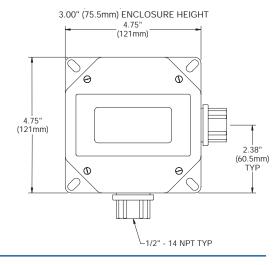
Panel mount IP65/NEMA 4X complete with mounting hardware
